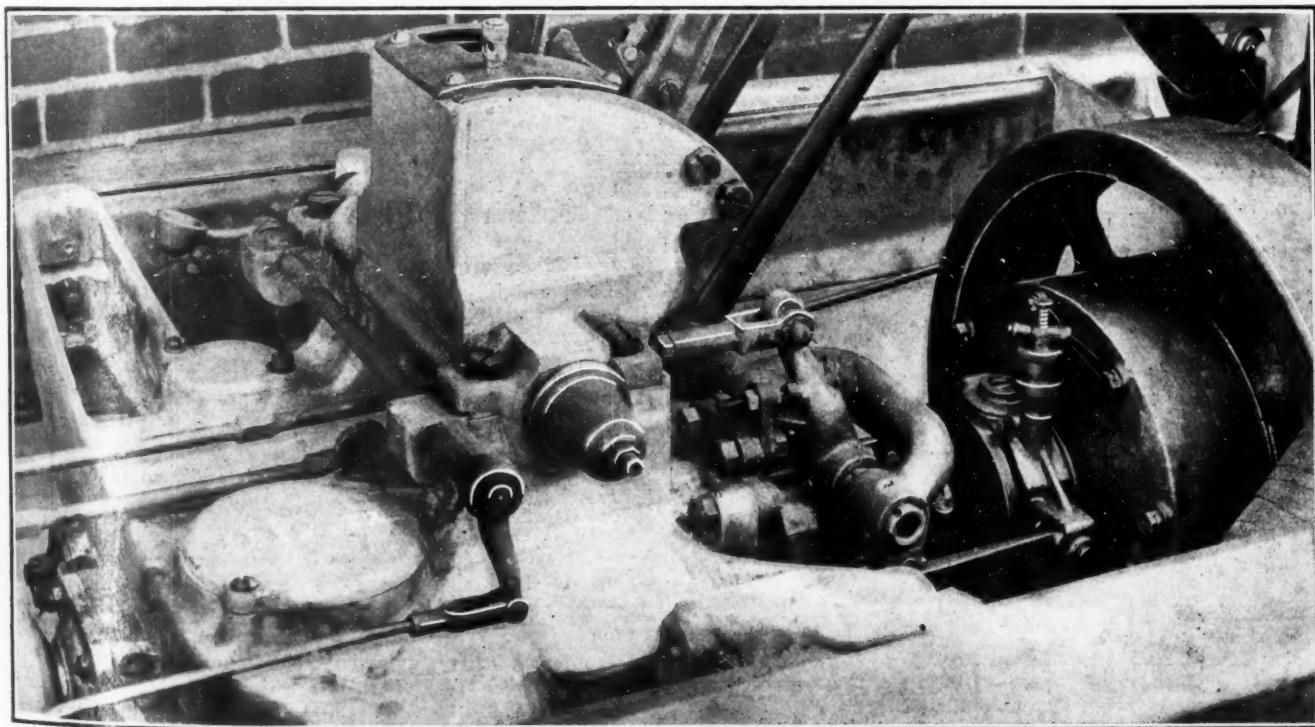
View of the gearset, control mechanism and clutch, showing oiling and adjustment points and suspension
